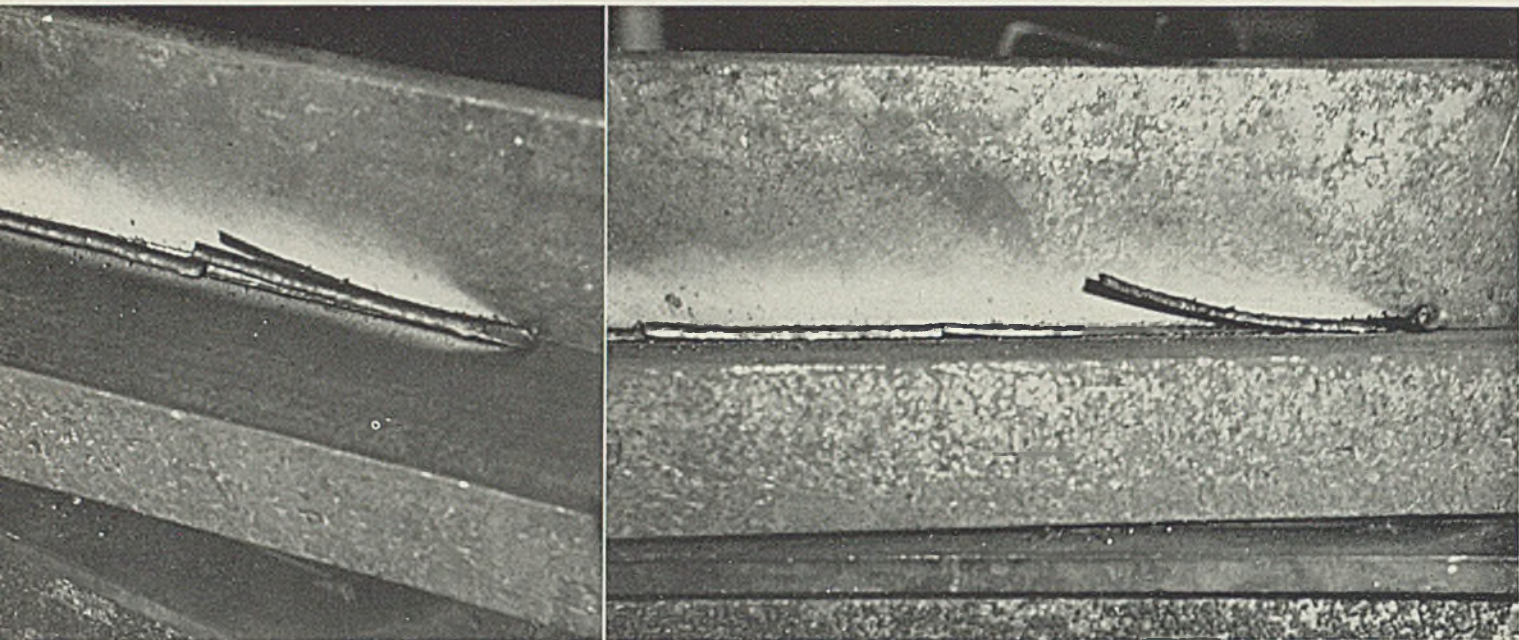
(Left, above)—Demonstrating self-removing slag, this photo was taken just a few minutes after completion of weld. Note slag is breaking into pieces and is rising from bead
